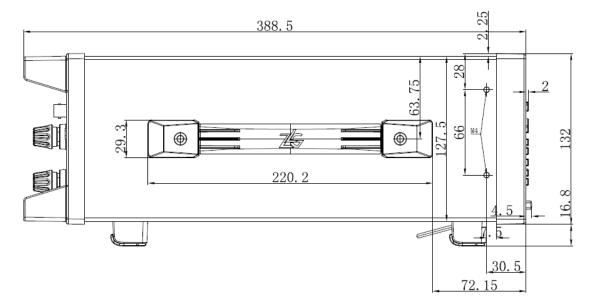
Mechanical dimension drawing of PA323 power meter (side view)
